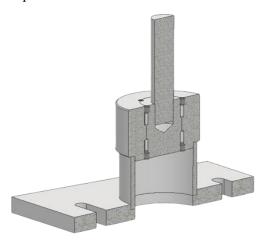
Assembly of the joint and auxiliary components on the pulsator.
